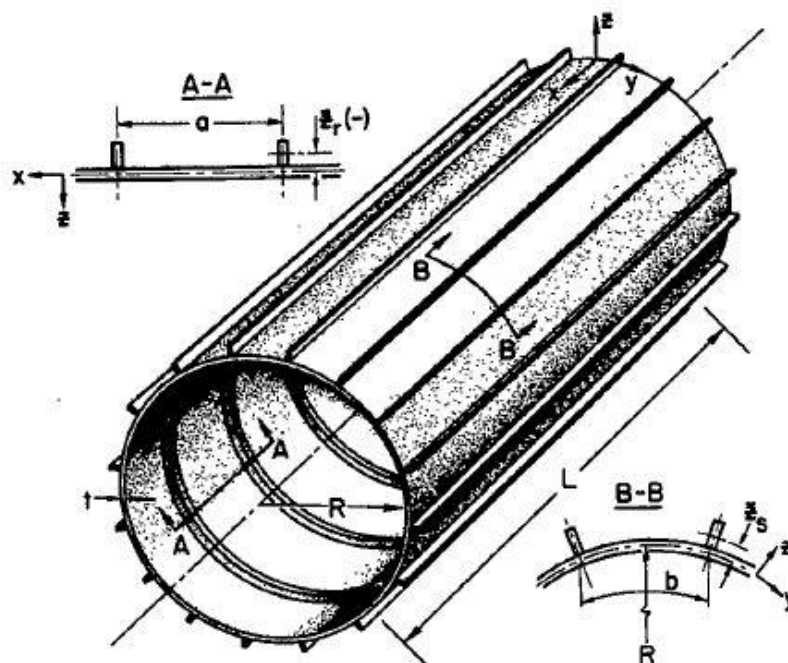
Pipe specimen with internal stiffeners (A-A) and external stiffeners (B-B) (Card and Jones, 1966).
